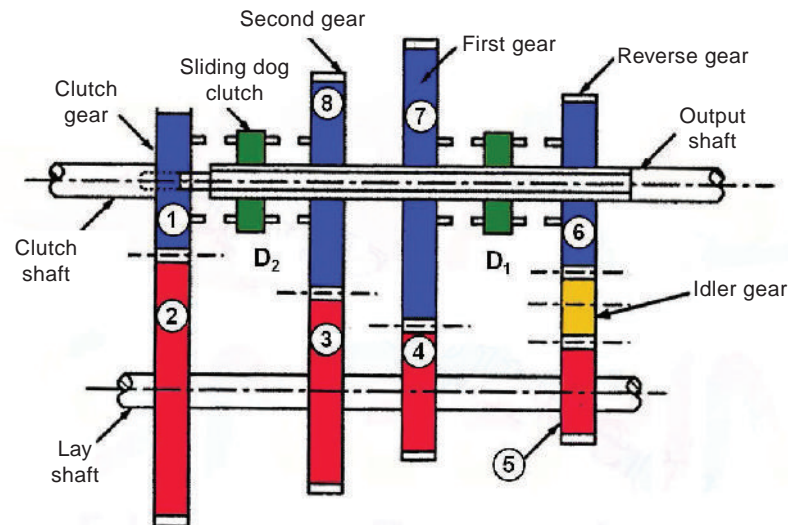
(a) Gear arrangements in the constant mesh gear box
